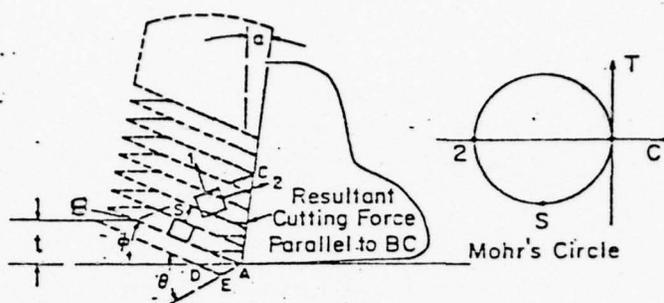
Concentrated Shear Model of Cutting with Mohr's Circle Diagram for Slip Line Field ABC. Fracture Surface at Tool Tip = AD for Ductile Material but AE for Brittle Material (AE is parallel to BC).
